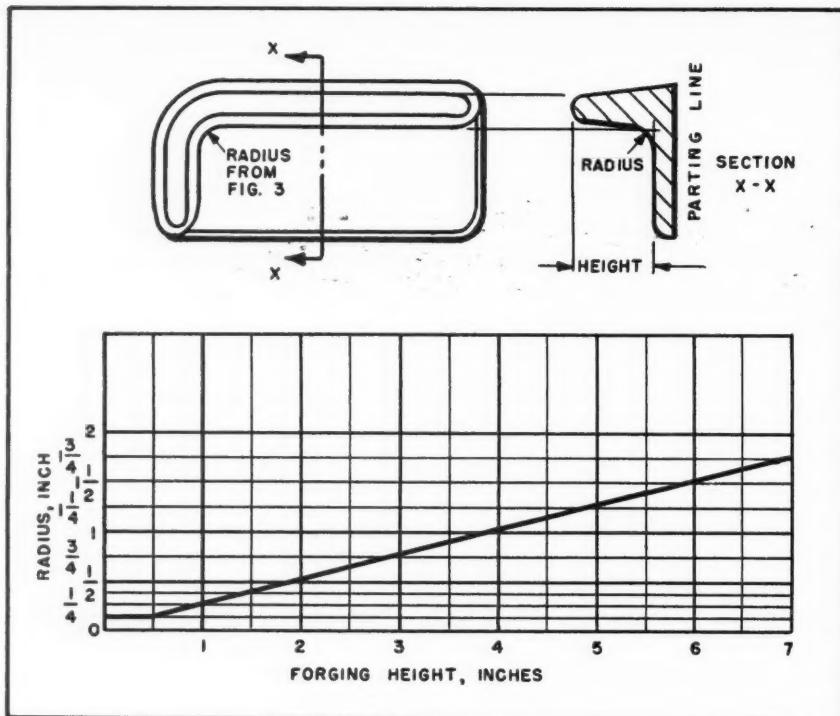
When the metal is not confined by the forging die, as in forming the fillet shown in section X-X, smaller fillet radii can be employed
